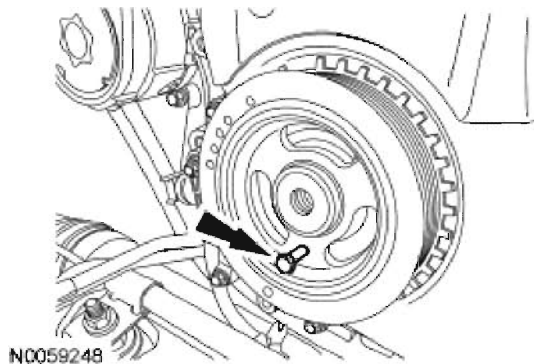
Locating Crankshaft Pulley & Hole
